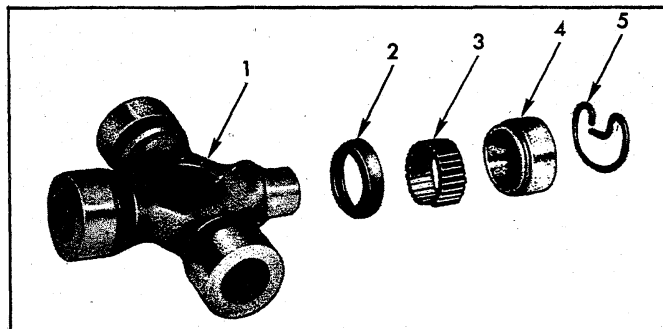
Propeller Shaft Trunnion (Dana Design)
